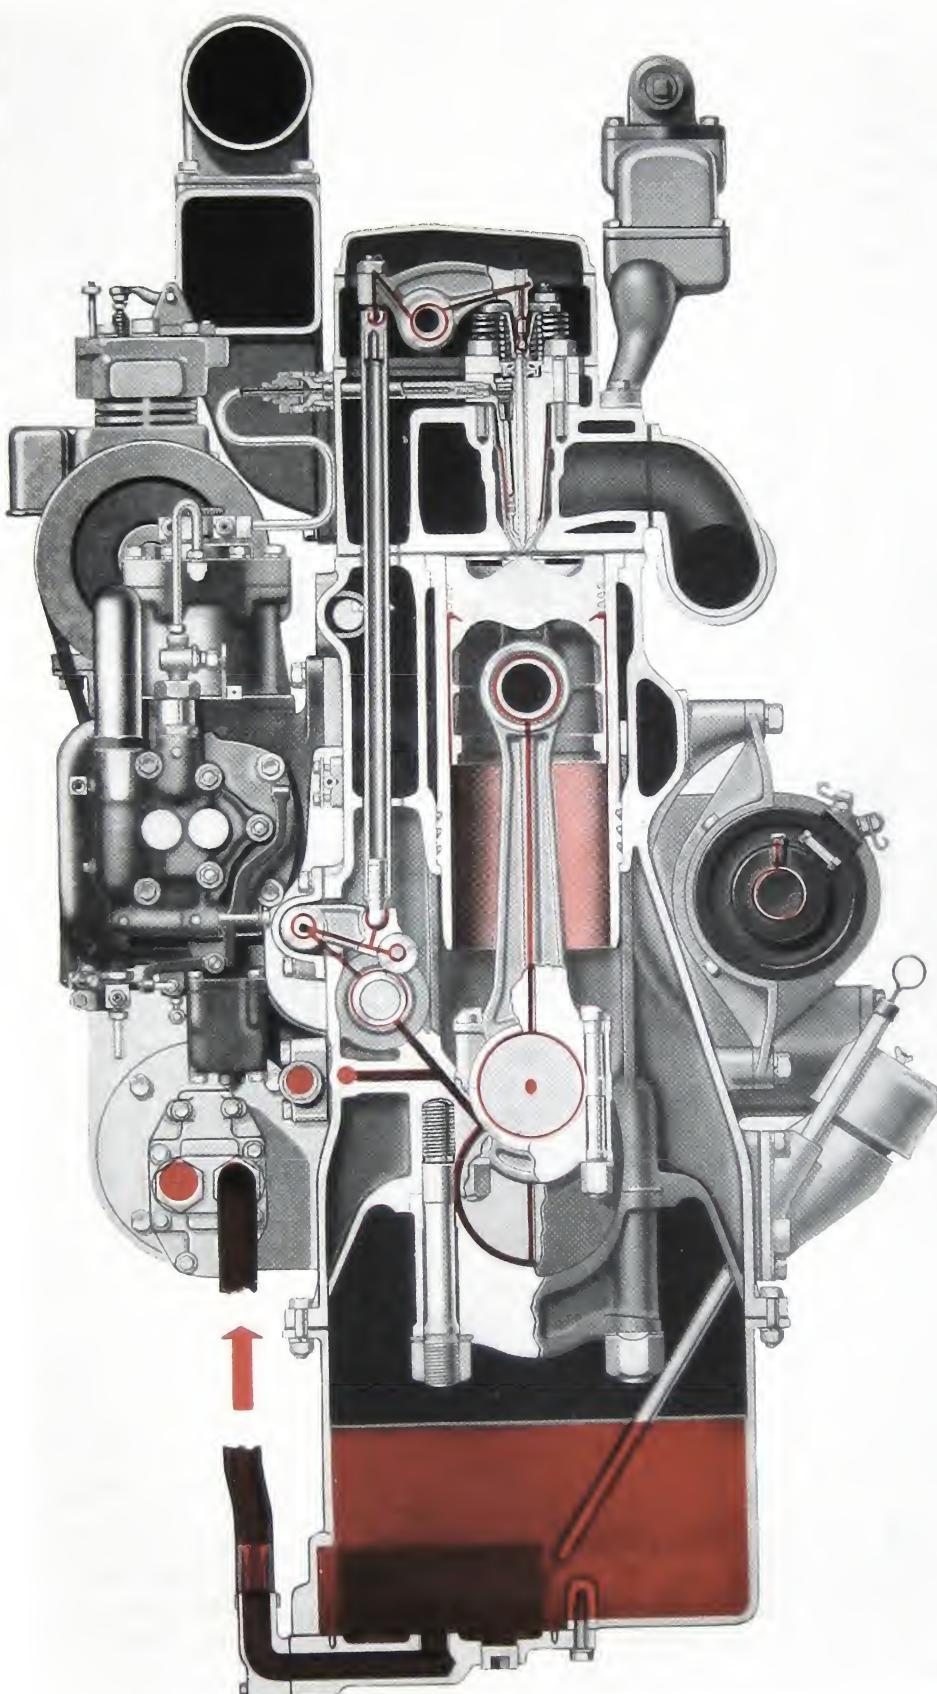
Lubricating oil diagram, end view—Model NH engine
